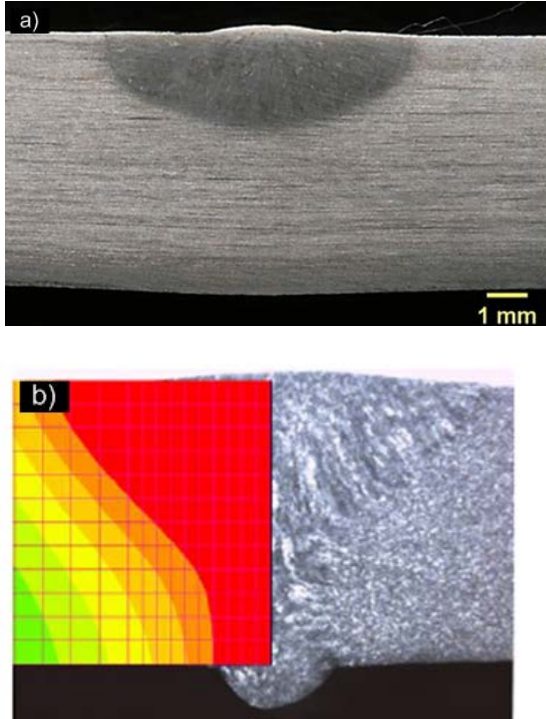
Two possible forms of penetration in TIG welding: seam shape without inflection point [26] – (a); weld shape with inflection [16] – (b).
